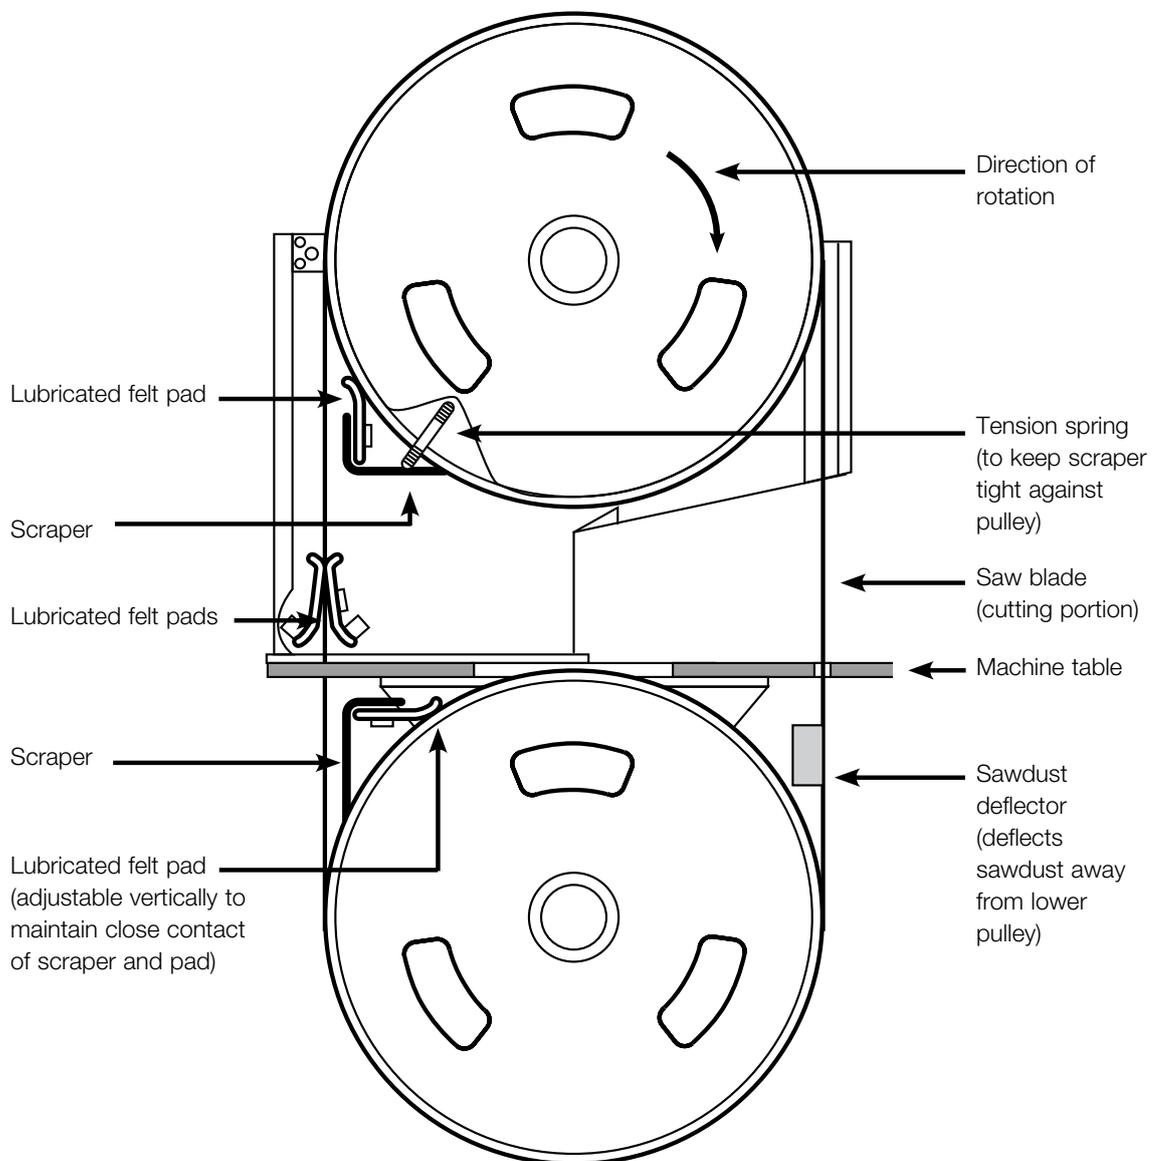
Band saw cleaning system (guards and machine detail not shown for illustration purposes)
